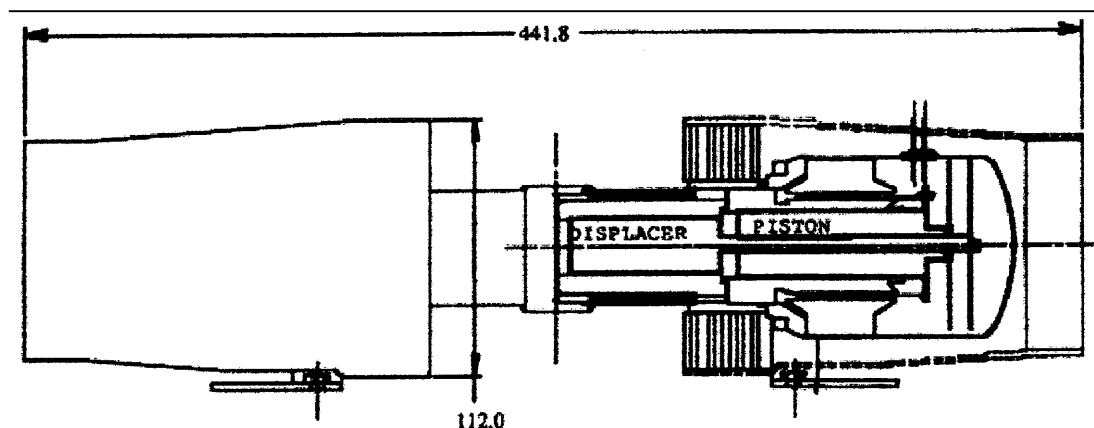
Opposed Free-Piston Stirling Cooler (Dimensions in mm)
